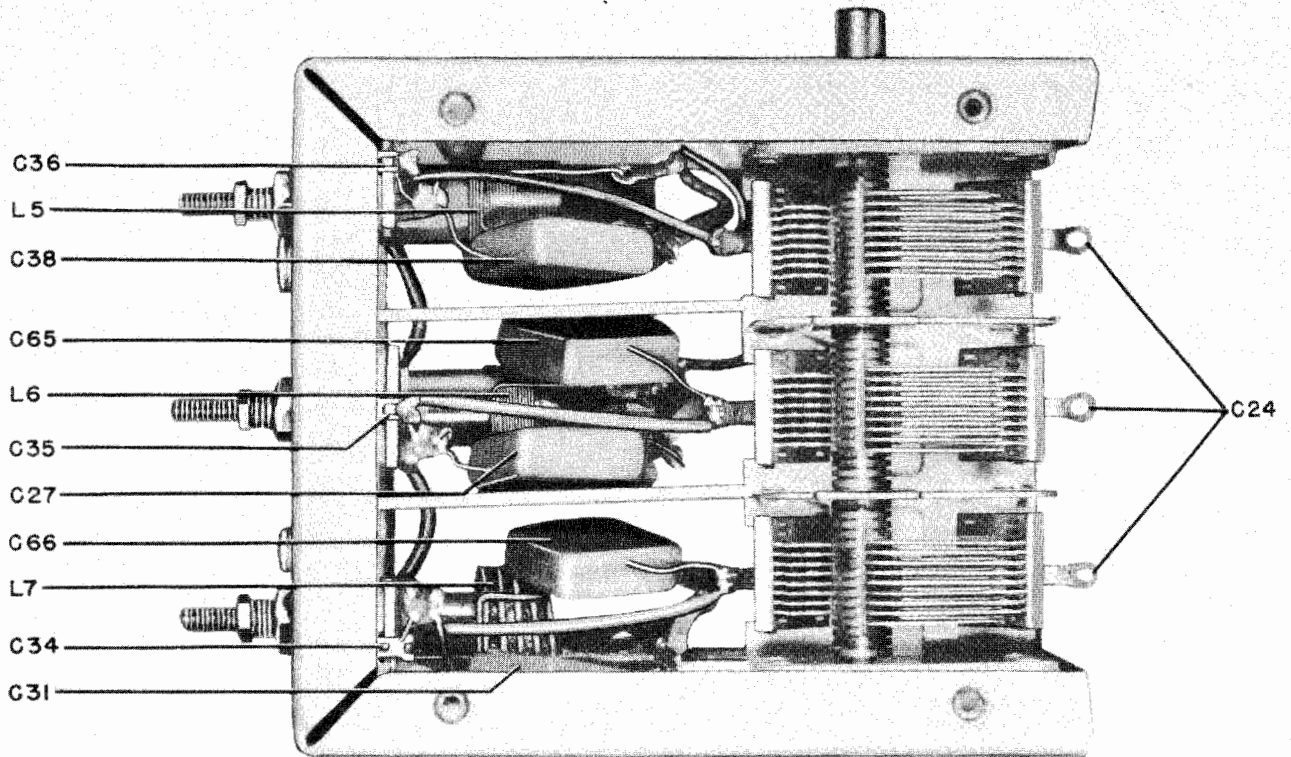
Multiplier Tuning Assembly, Right Side, Location of Parts
